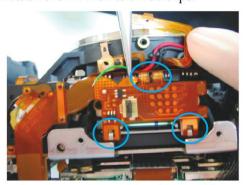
Auto Focus FPC Ass'y Assembly 3
